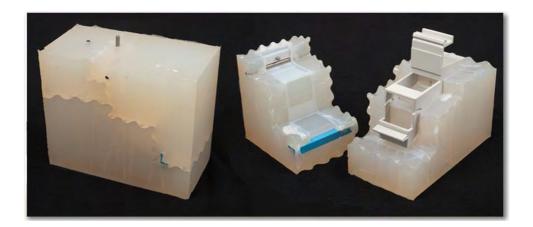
Tooling prototype for a consumer product Source :< http://www.p1technology.com/prototyping.aspx>27/10/10
